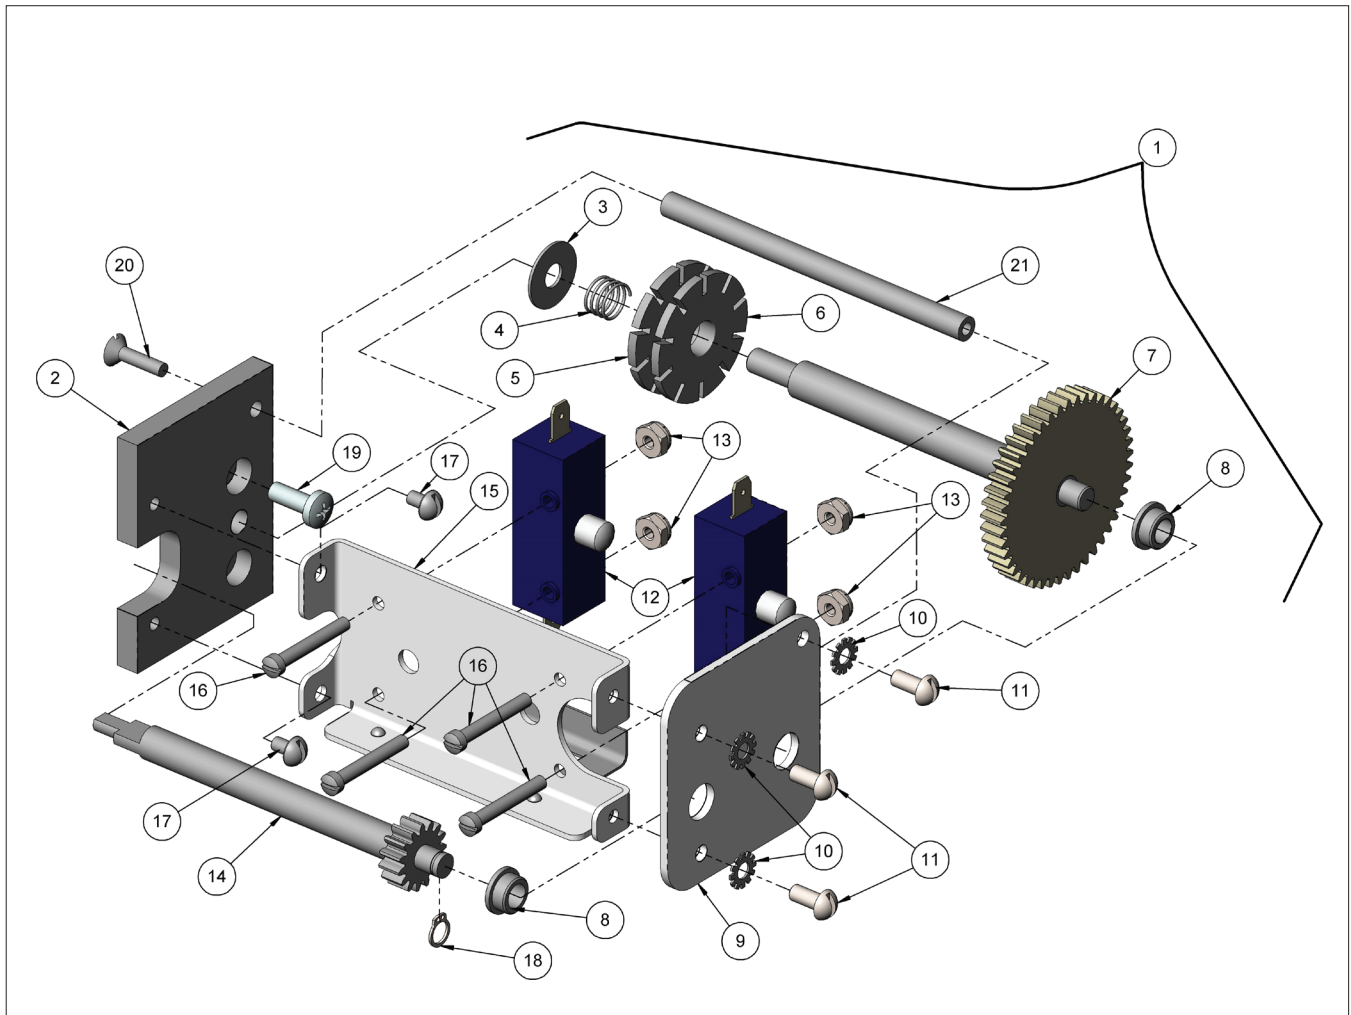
B. GEARED LIMIT SWITCH PARTS USED ON LONG LIFT HOISTS
